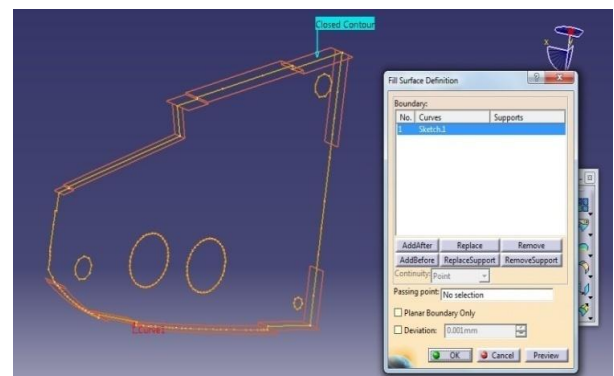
Filling Surface option to Wing Rib Model using Fill surface option
